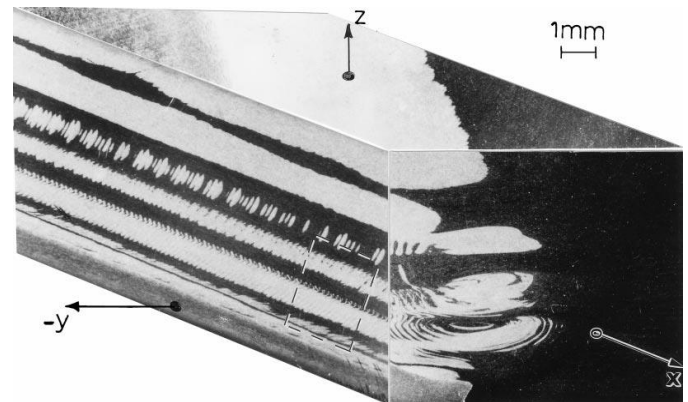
Reconstruction view of weld joint of AA2024/AA6061 [11]
